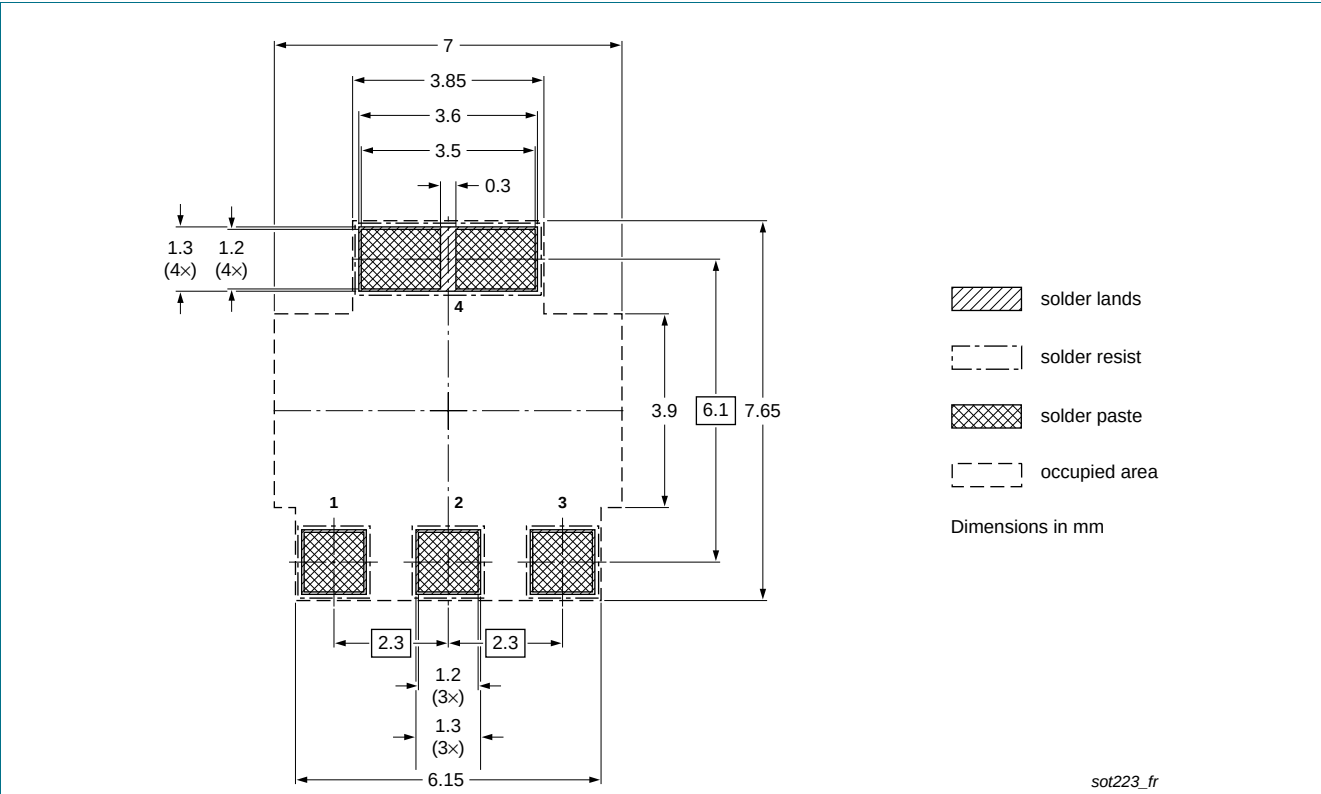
Reflow soldering footprint SOT223 (SC-73)
